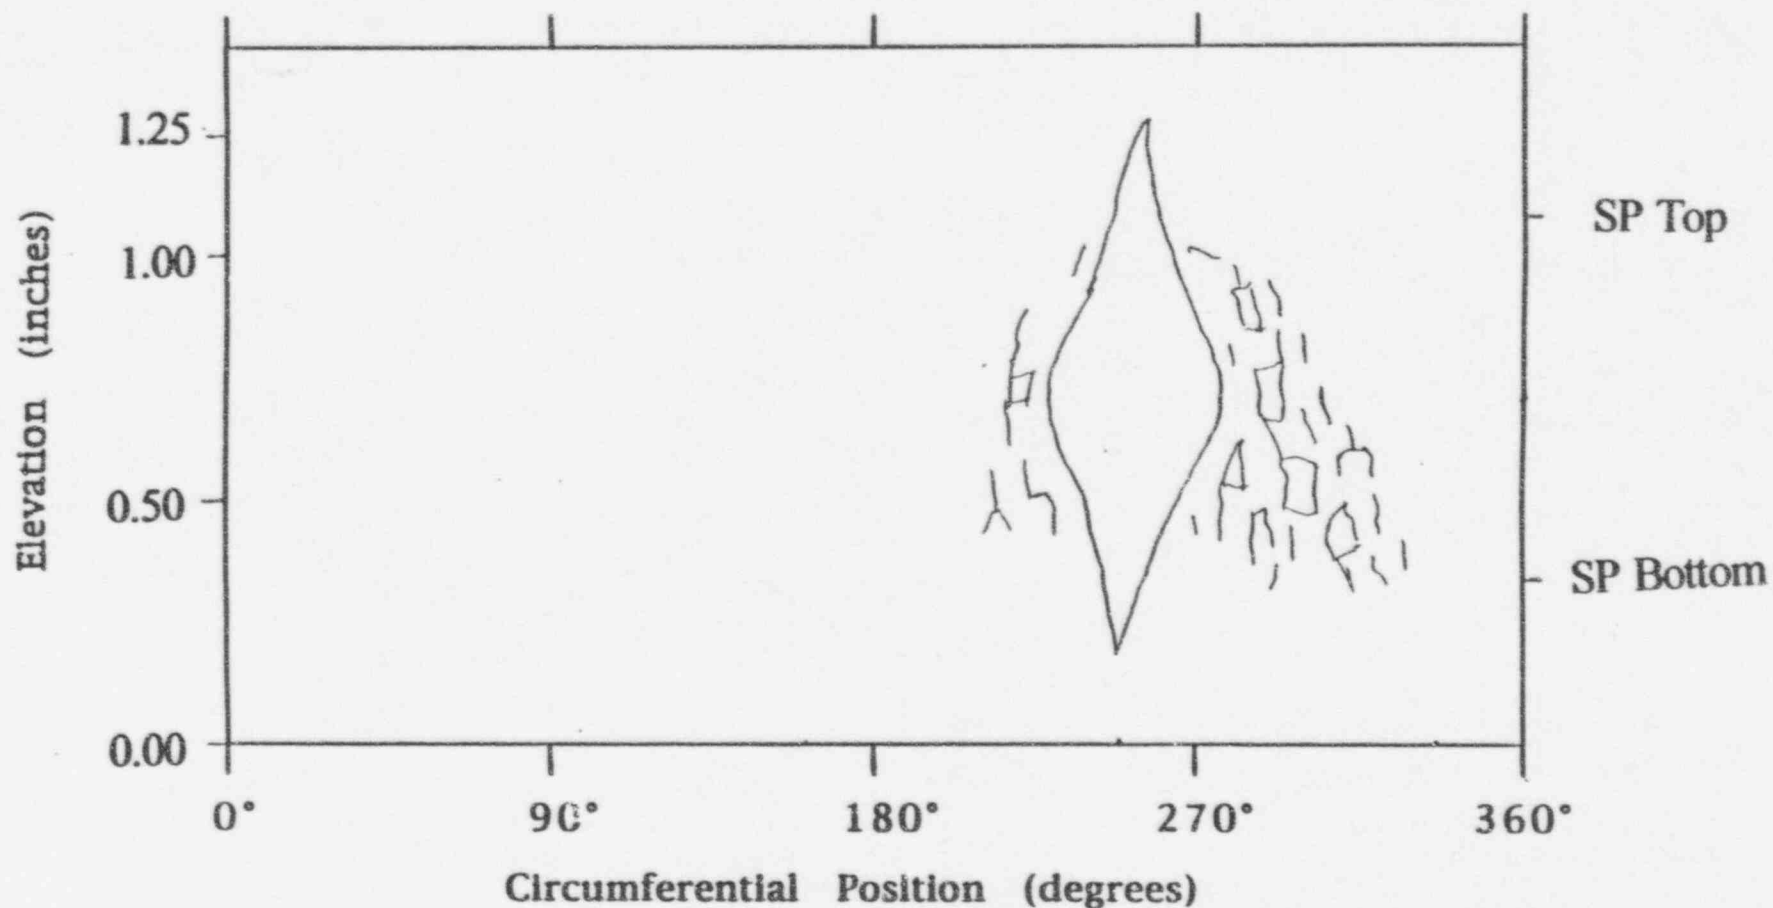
Sketch of the OD crack distribution found at the first support plate (TSP1) of Tube R8C60. Also shown is the location of the burst fracture opening. The burst opening extended beyond the TSP crevice region, but the corrosion cracking was confined to the crevice region.
